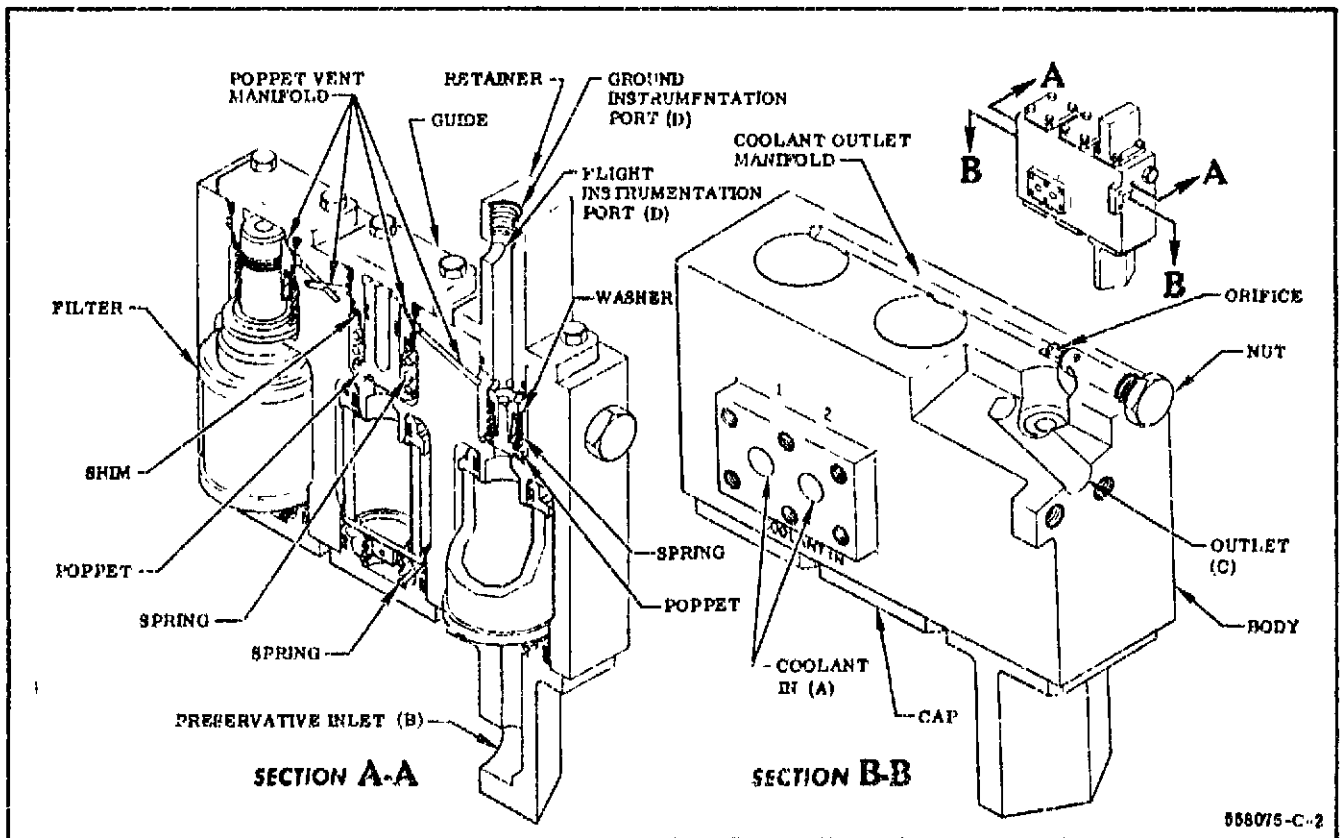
Bearing Coolant Control Valve--Cutaway View
